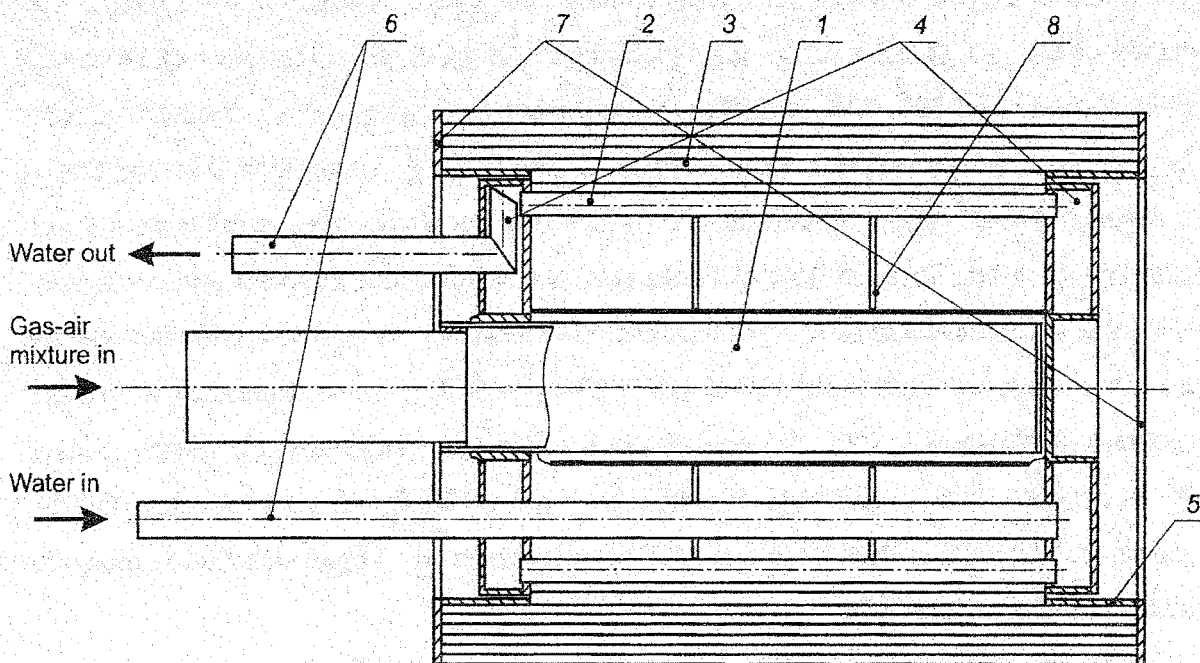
General view of CHGE: 1- GDT, 2 – connecting tube of the inner water-cooled heat exchanger, 3 – catalytic plate, 4 – water collector, 5- end-face ring, 6 – inlet and outlet water tubes, 7 – flange, 8 – stiffening rib
